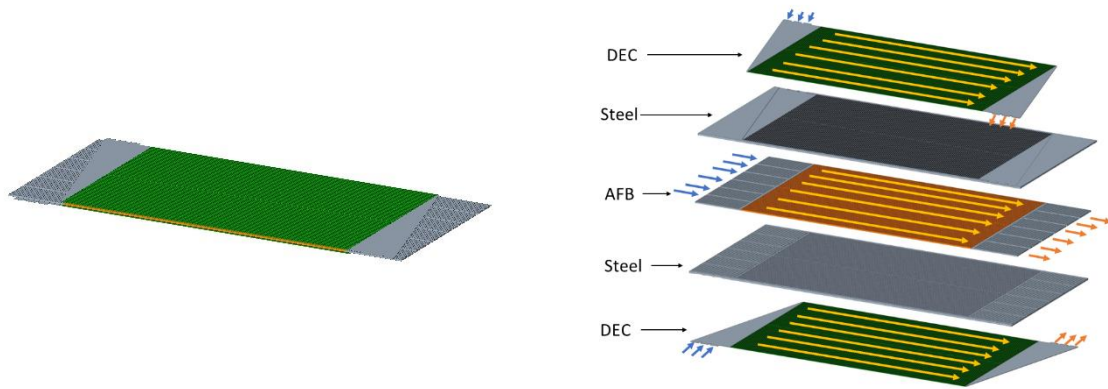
Geometry of the integrated reactor. Left: Compact view of the reactor. Right: Exploded assembly drawing of the geometries, including the steel part, the part of the reactor where the ammonia decomposition takes place (DEC), and the part where the tail gas combustion takes place (AFB).
